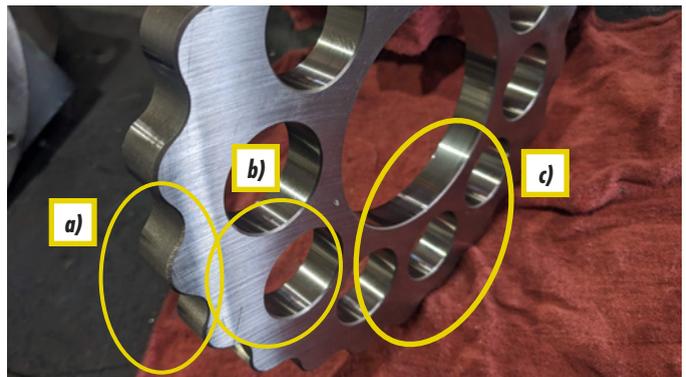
Condition of the Cyclo discs. a) Cyclo discs’ lobes show mild polishing. b) Low-speed shaft pin’s contact surfaces and c) eccentric bearing’s outer race both show mild abrasion.
